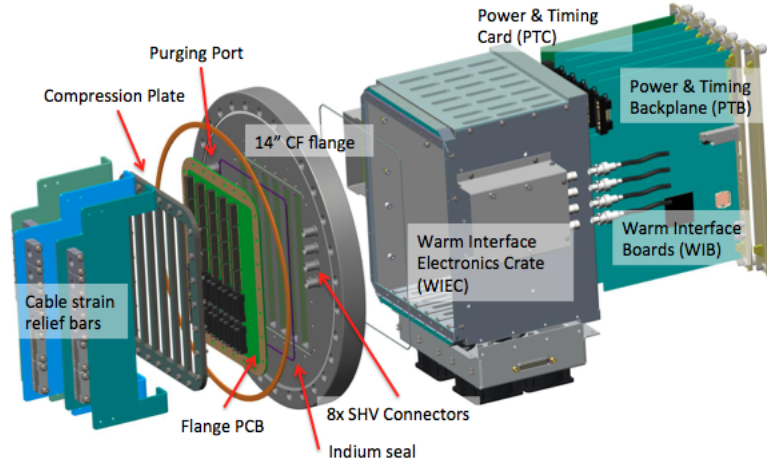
TPC readout electronics flange. The mechanical components are (1) the CF flange assembly including compression plate and strain relief bars and (2) the WIEC.
